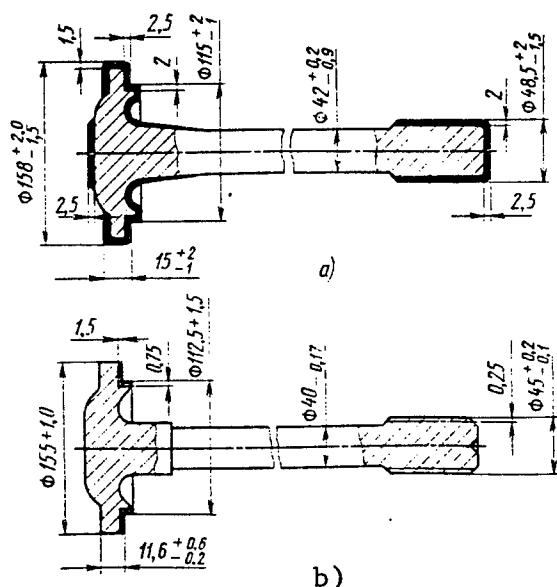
Truck Half Axle Forgings Made by Traditional Method
